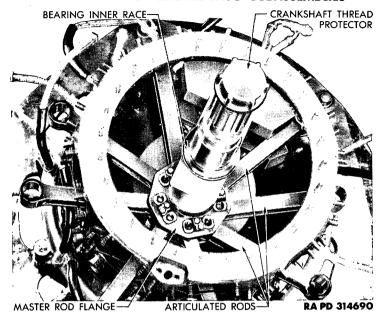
Interior of Main Crankcase Section Prior to Removal of Articulated Rods
